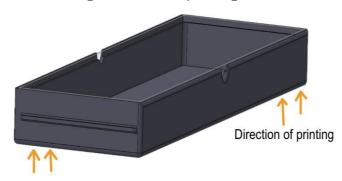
Isometric view showing the direction of the print for the drip tray.
